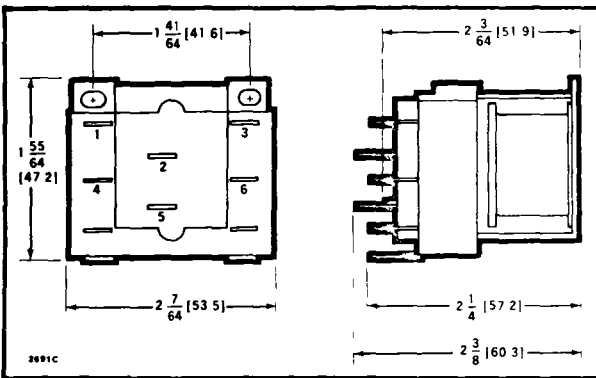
RELAY DIMENSIONS IN INCHES [MILLIMETRES IN BRACKETS].
